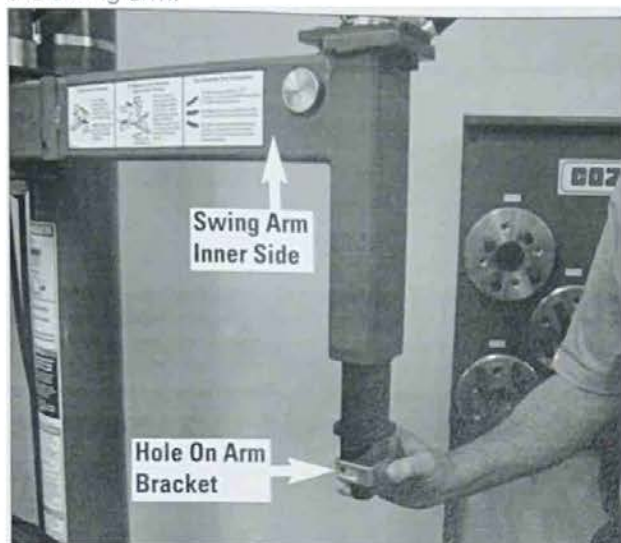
Position Hole On Arm Bracket To Face Inner Side of Swing Arm
